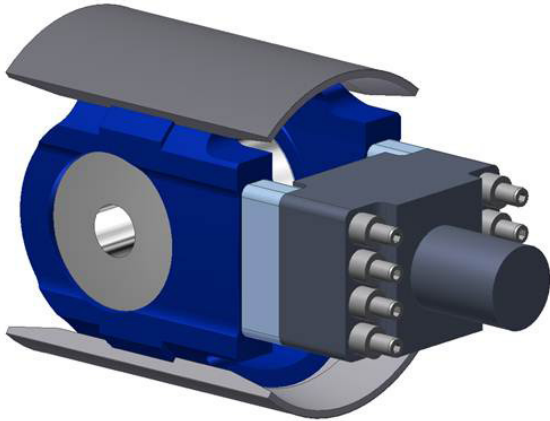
Schematic drawing of a flexible crosshead design. The crosshead (blue) with cylindrical small-end pin bearing and both shoes (grey) is connected to the flange and the piston rod (right). The shoes particularly deform at the unsupported flexible edges.
